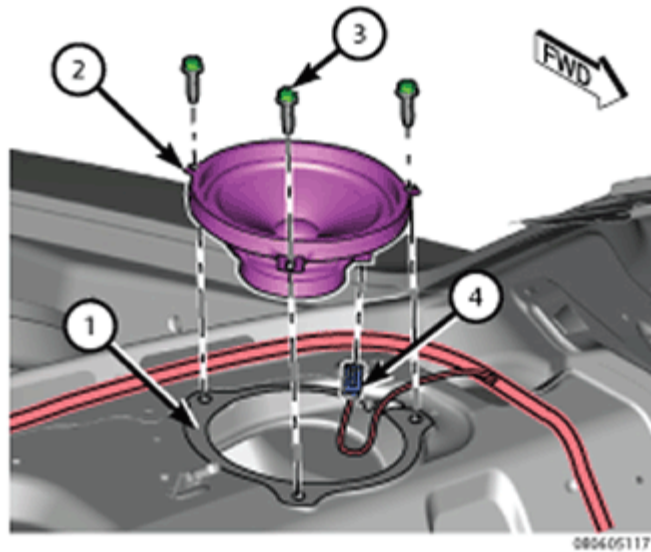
Shelf Panel Support, Speaker, Wire Harness Connector & Screws
